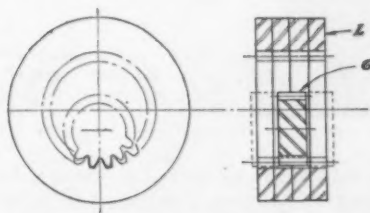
Internal-external lapping. In this case the work gear is permitted to roll with the lap.
